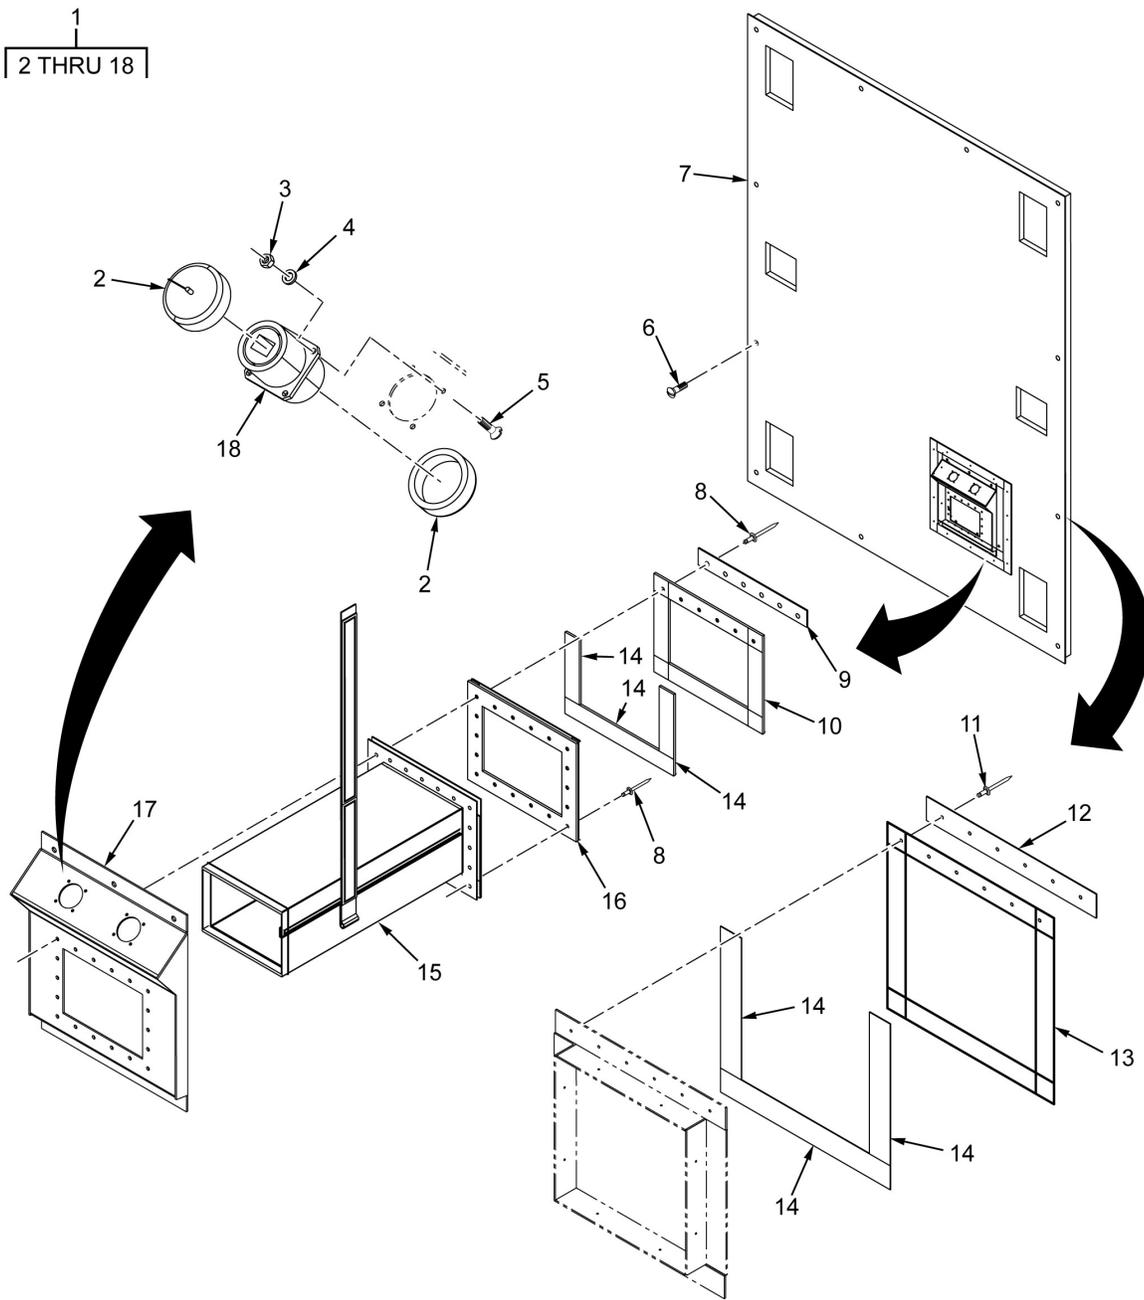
MODIFIED SHELTER WALLS (Sheet 2 of 2)
